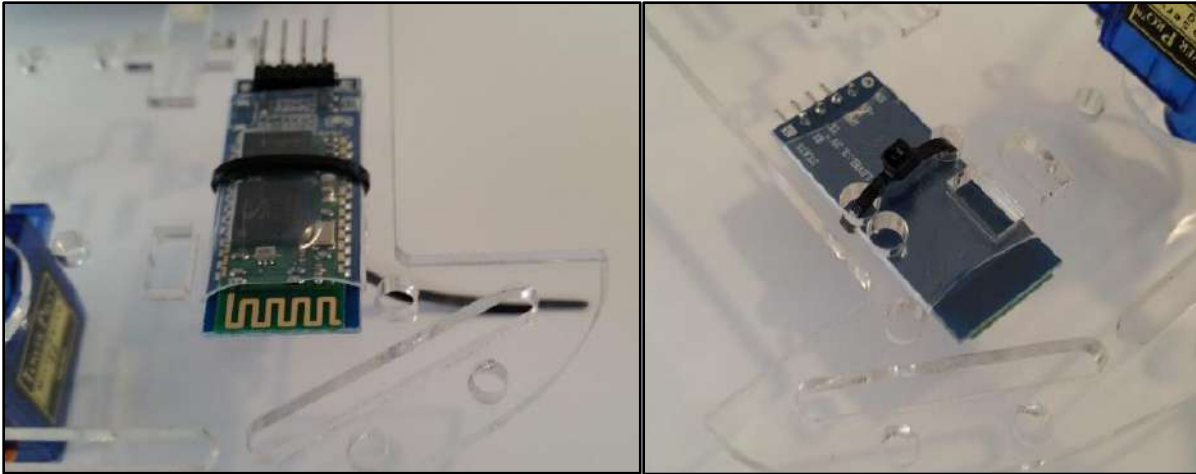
Bluetooth Module Zip-Tied to the Chassis Top Plate
